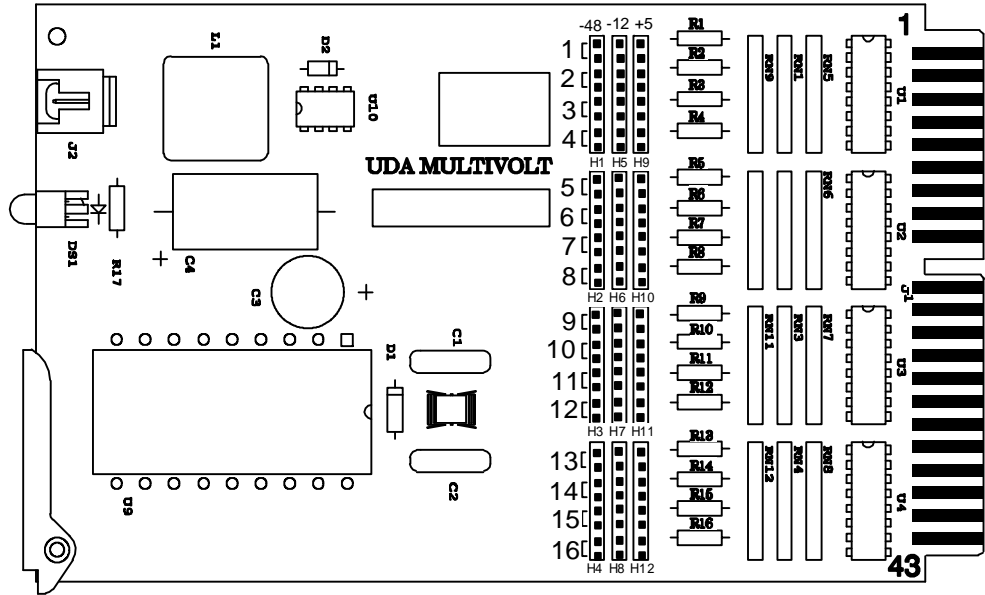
Universal Discrete Adapter Plug-in Board Layout
